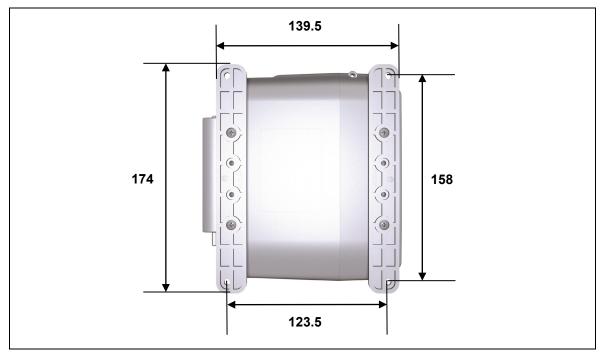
Mounting dimensions of the holes. View from below (in mm)
